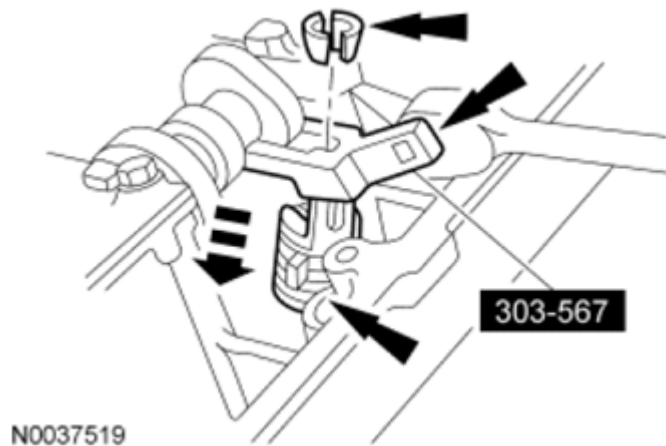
Compressing Valve Springs Using Valve Spring Compressor
